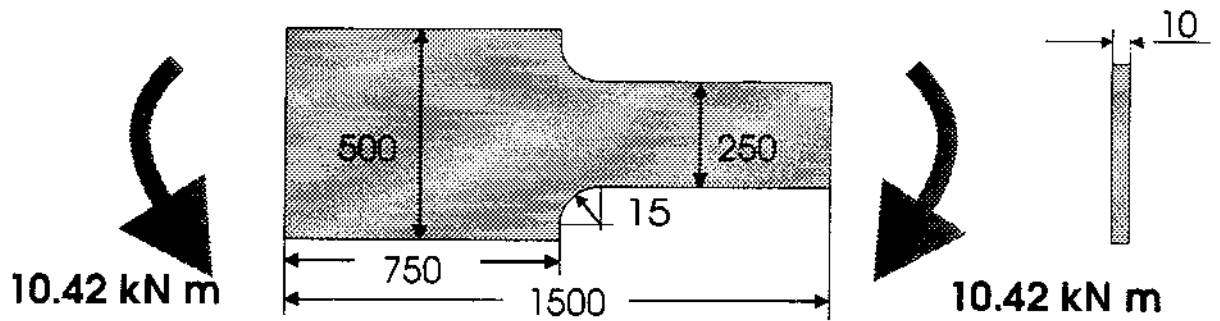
Geometry and Dimensions for Plate *with* Shoulder Fillet (Bending Moment)
